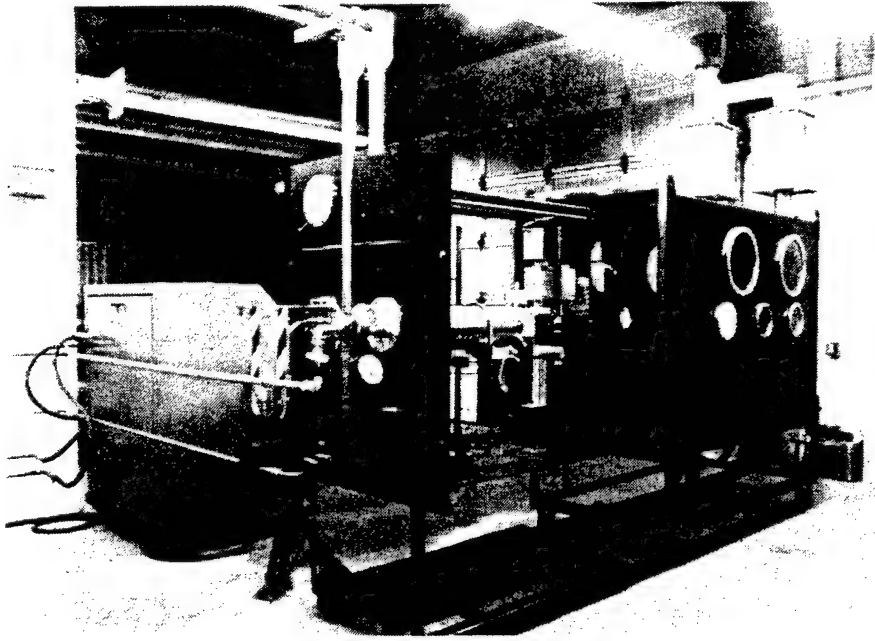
Overall View of Spray Casting Equipment During MSE Test Series.
